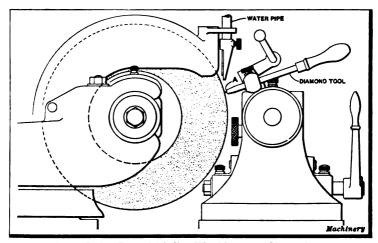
Truing Face of Grinding Wheel by use of Diamond Tool
